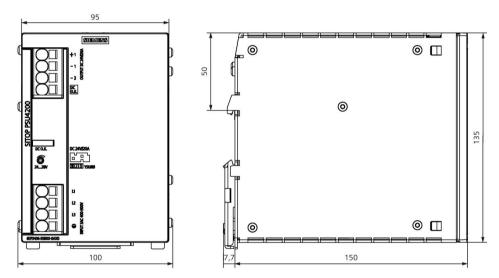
Dimension drawing 6EP3436-3SB00-0AX0 (24 V/20 A)
